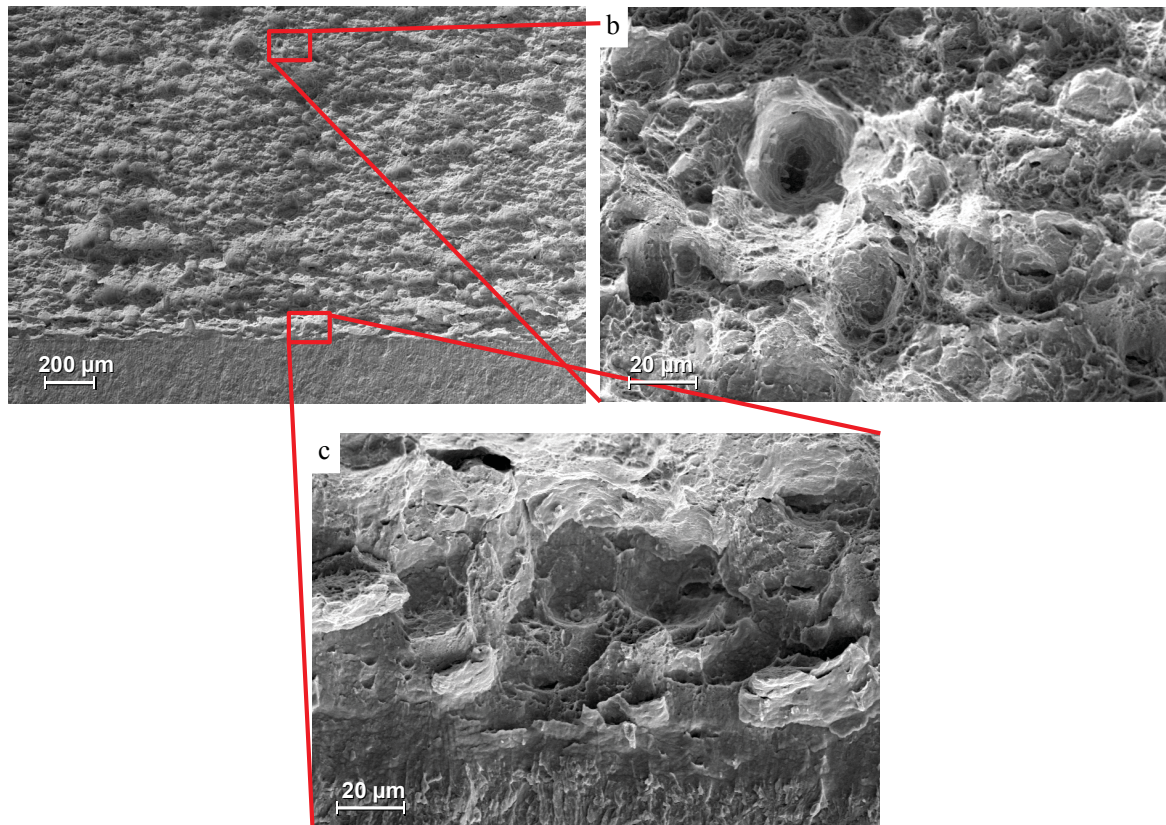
SEM analysis of a fractured SENB sample, which was cryogenically treated tempered at 600°C for 5 h. (a) Overview image from the fracture surface. (b) Fracture surface about 1.2 mm away from the precrack. (c) Fracture surface near the fatigue precrack.
